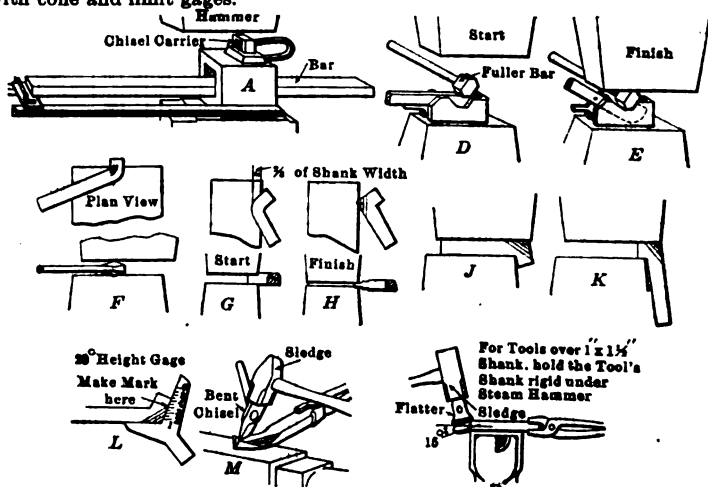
Forging Operations for Straight Round-nose Roughing Tool.
